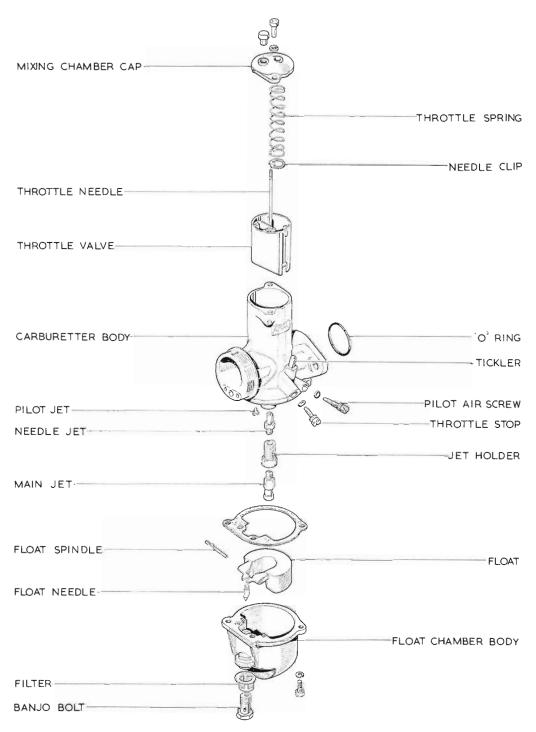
Carburetter exploded—concentric float chamber. (Fitted on and after Engine No. B44-EA101 on Victor Enduro and Special (U.S.A.) models only).
